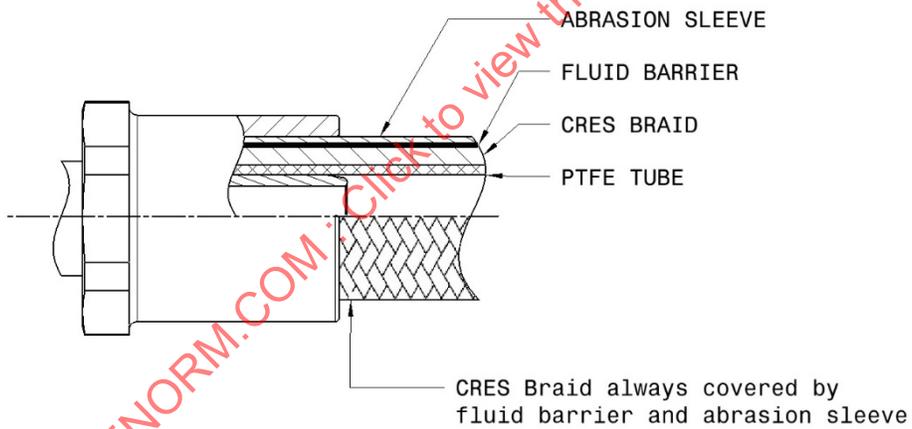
FITTING CAPTURED INTEGRAL ABRASION SLEEVE WITH FLUID BARRIER /31/
